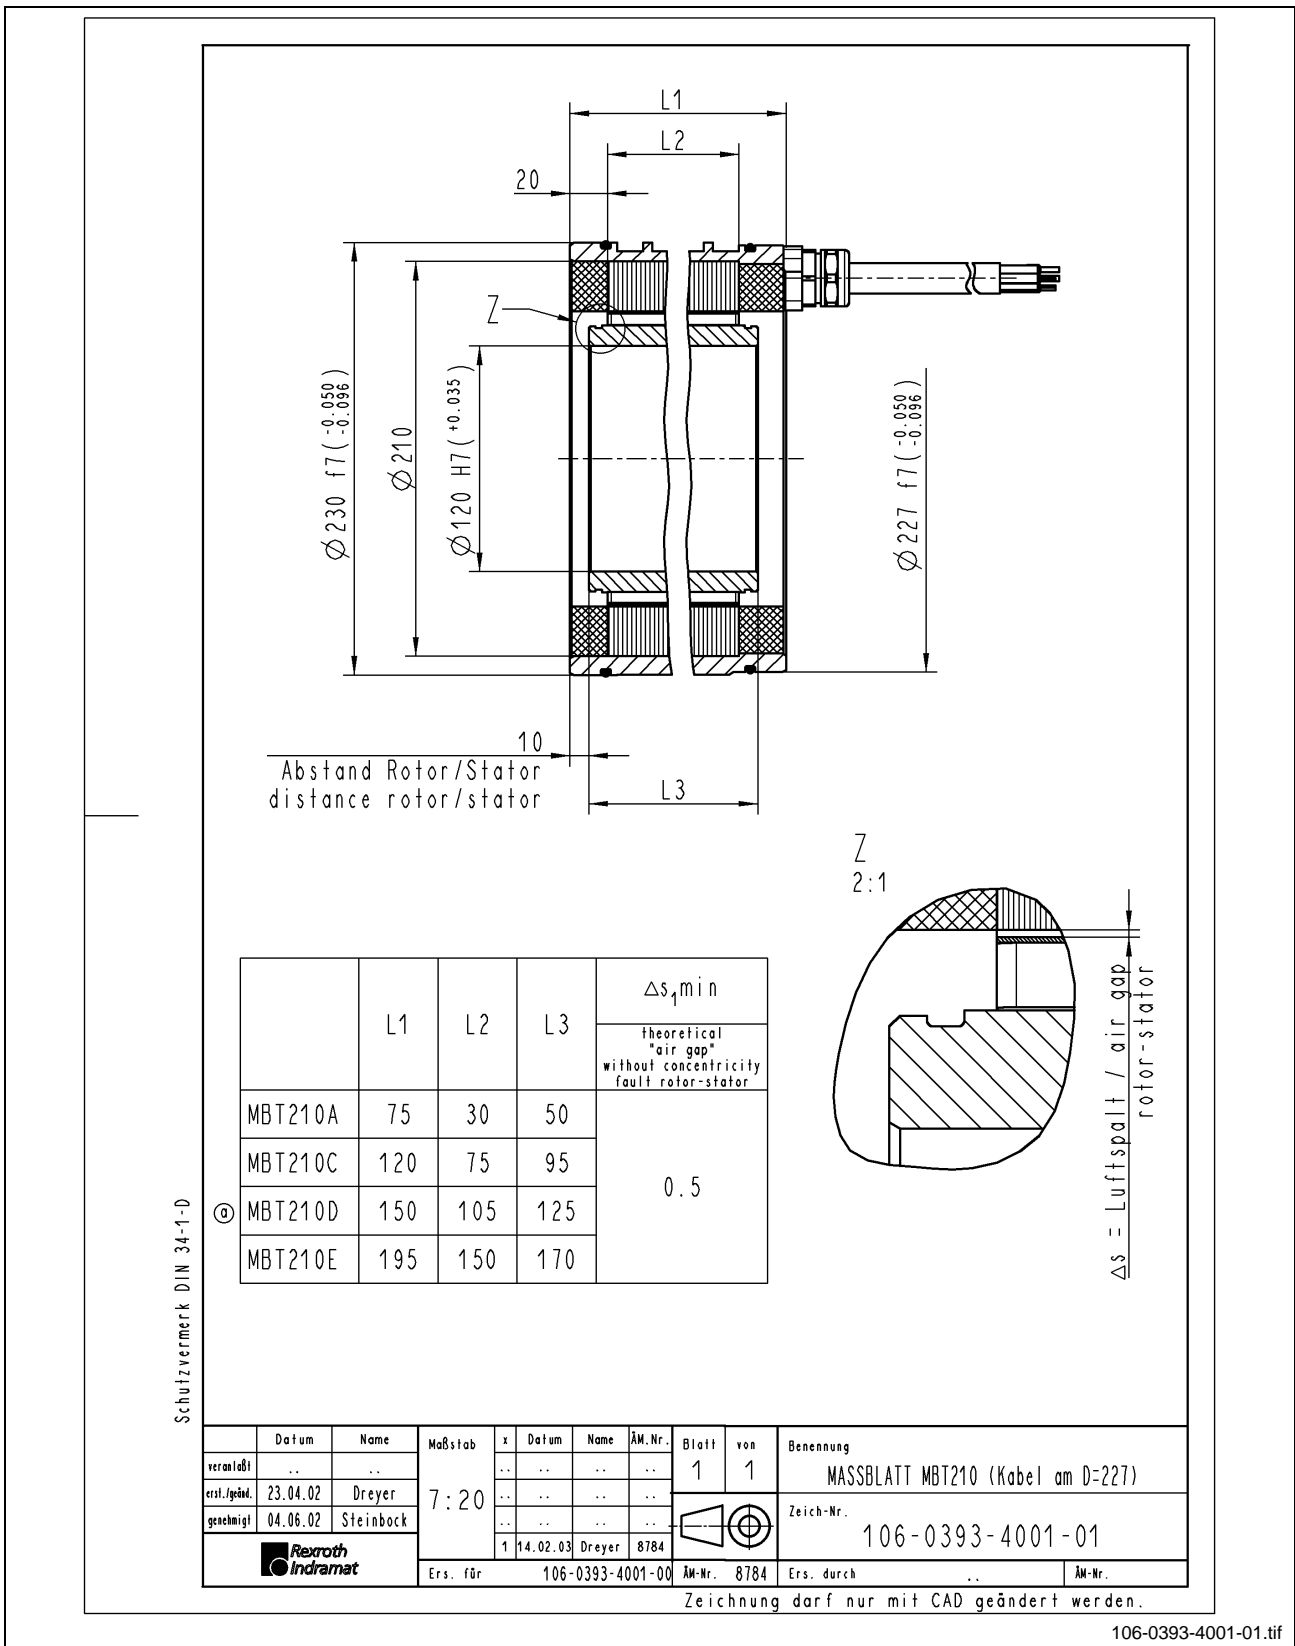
Dimension sheet size 210, electrical connection "SN"
